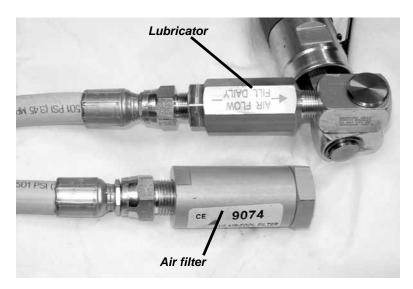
The air hose connection has a built-in air filter to keep the air motor clean, and a lubricator to oil the motor.
